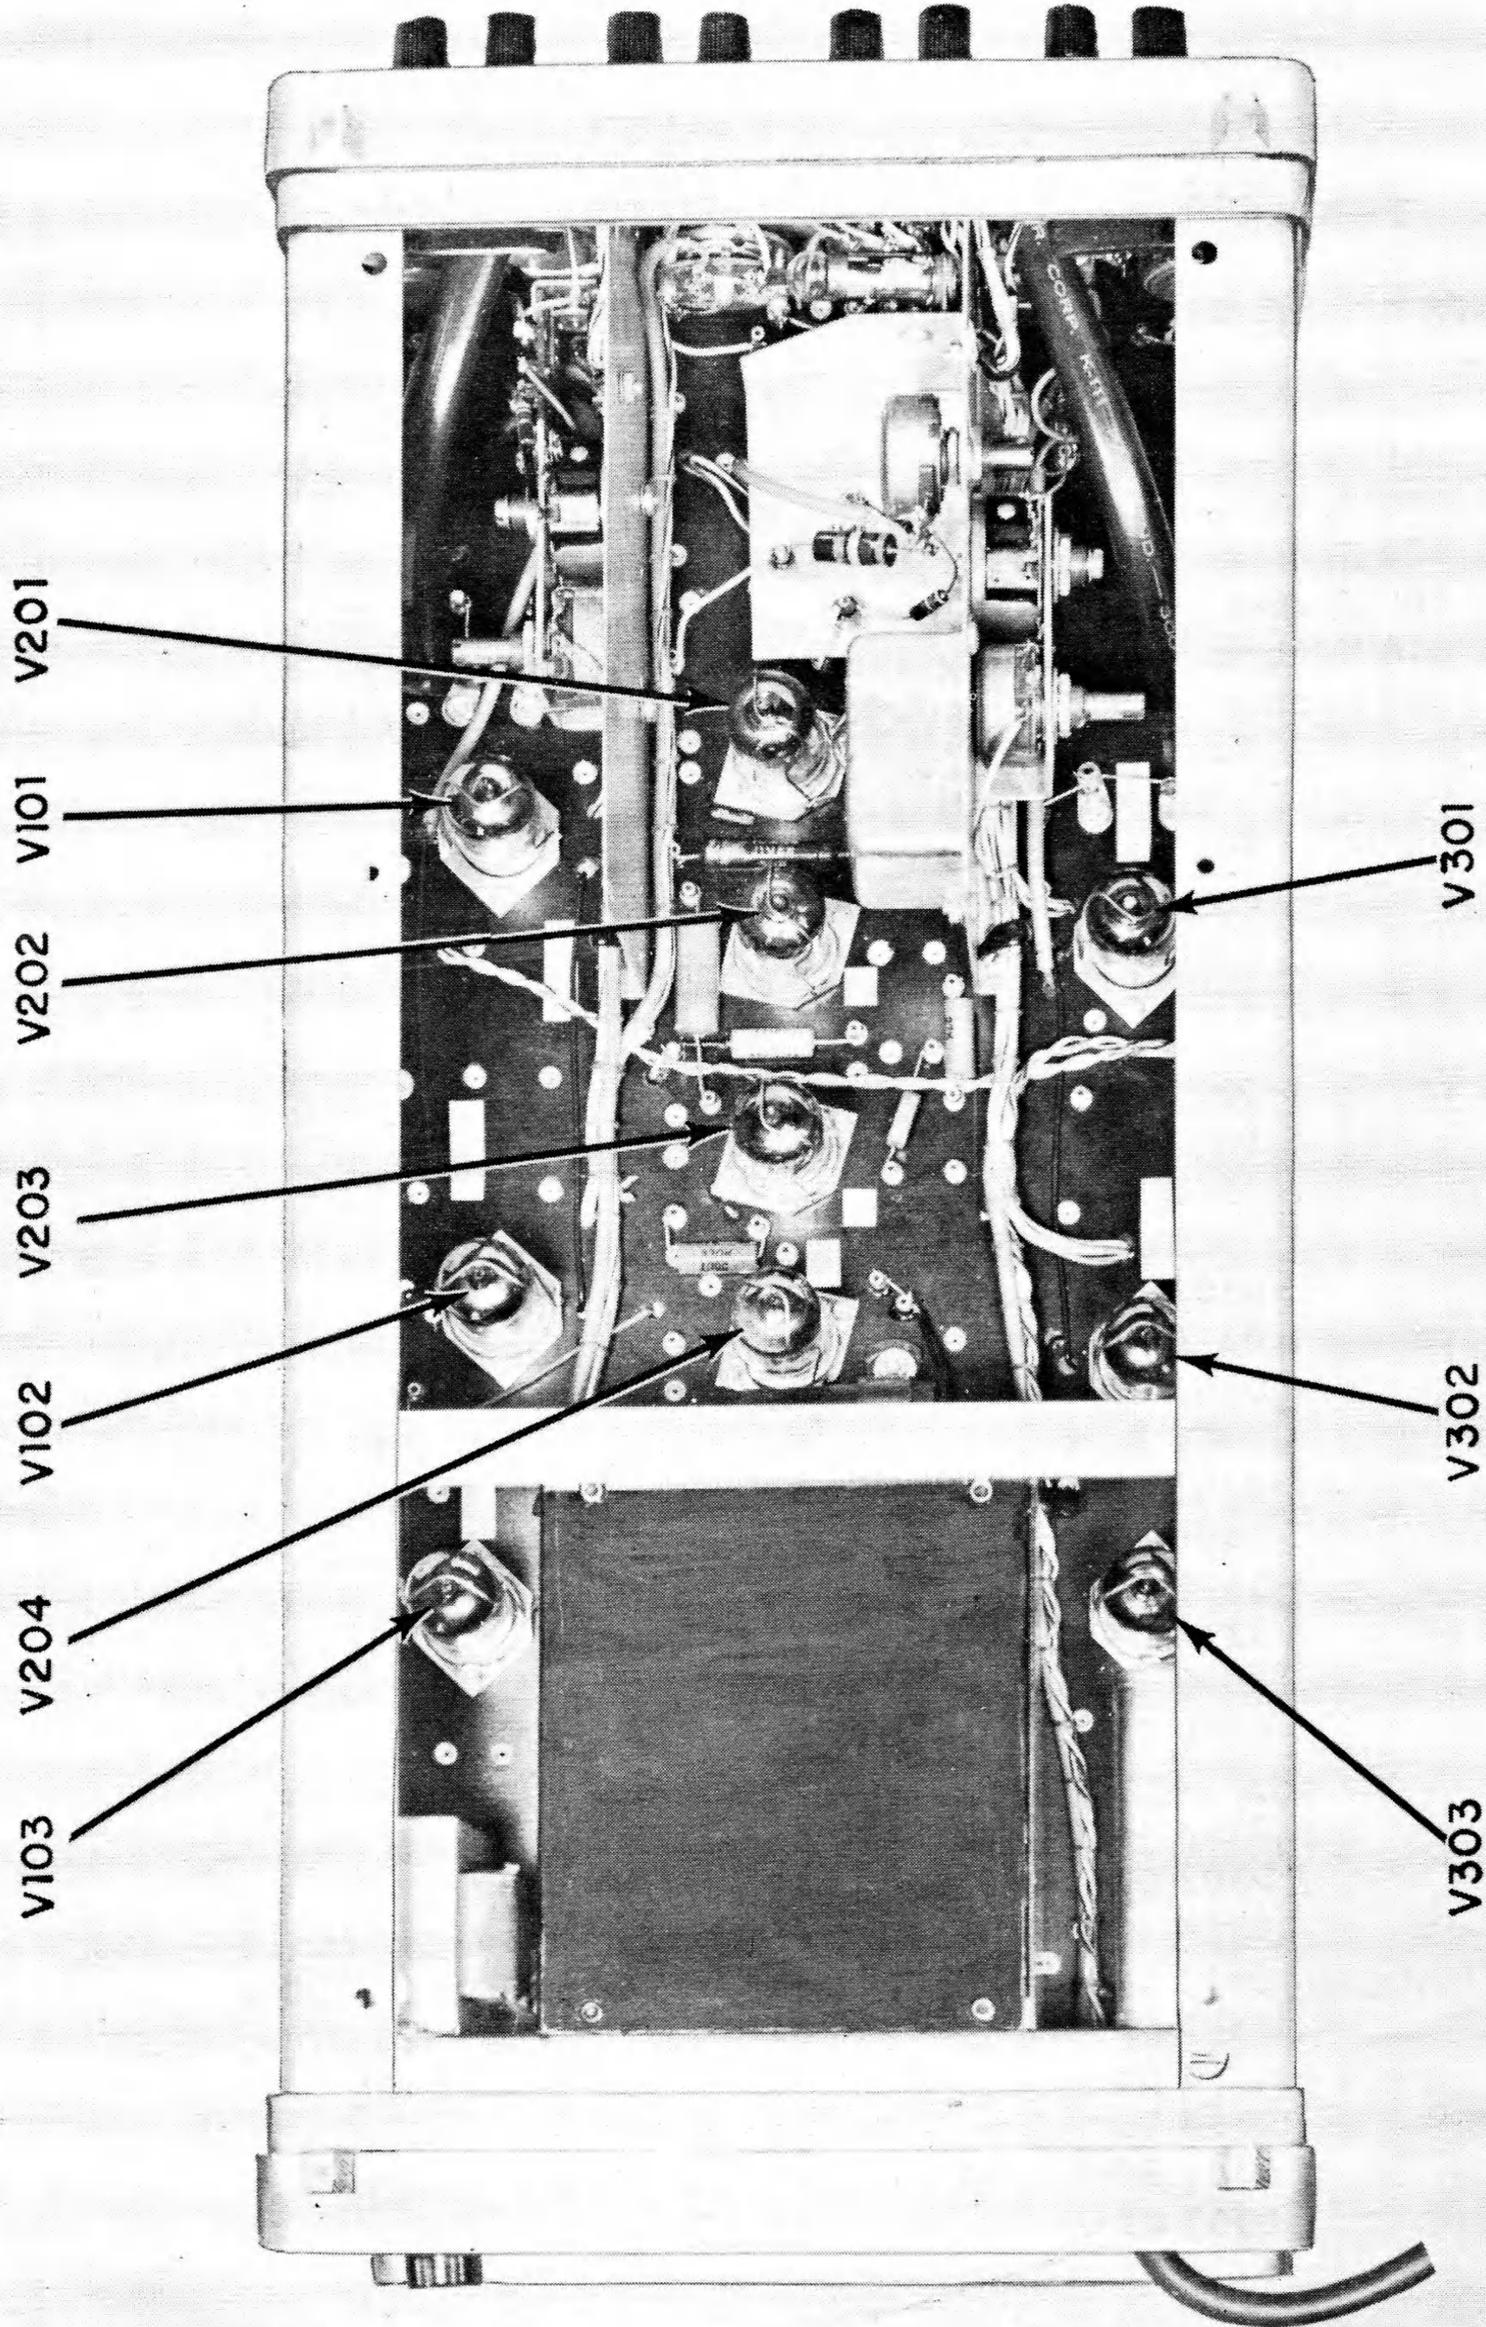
BOTTOM VIEW (SOLA SUPPLY)
